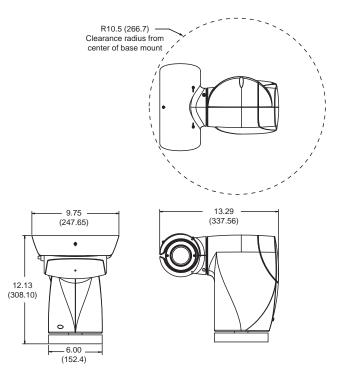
Dimensions, 5970^{sD}, for camera system with other than 100 mm lens. Dimensions in inches (mm)
